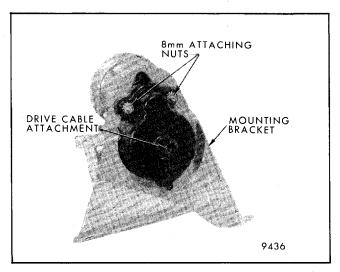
Drive Motor and Gear Reduction Unit
